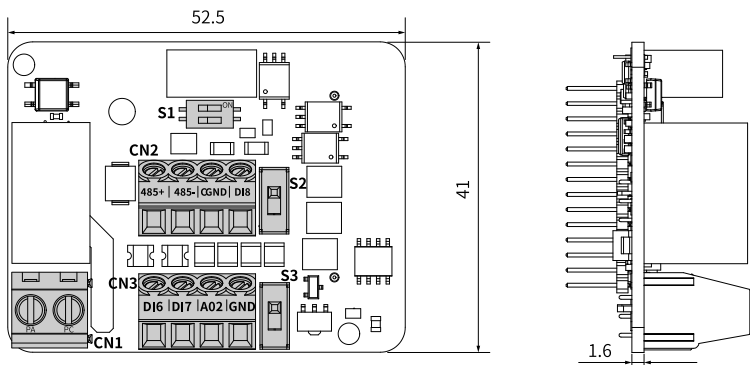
Outline dimensions of the MD520IO1 card (unit: mm)
